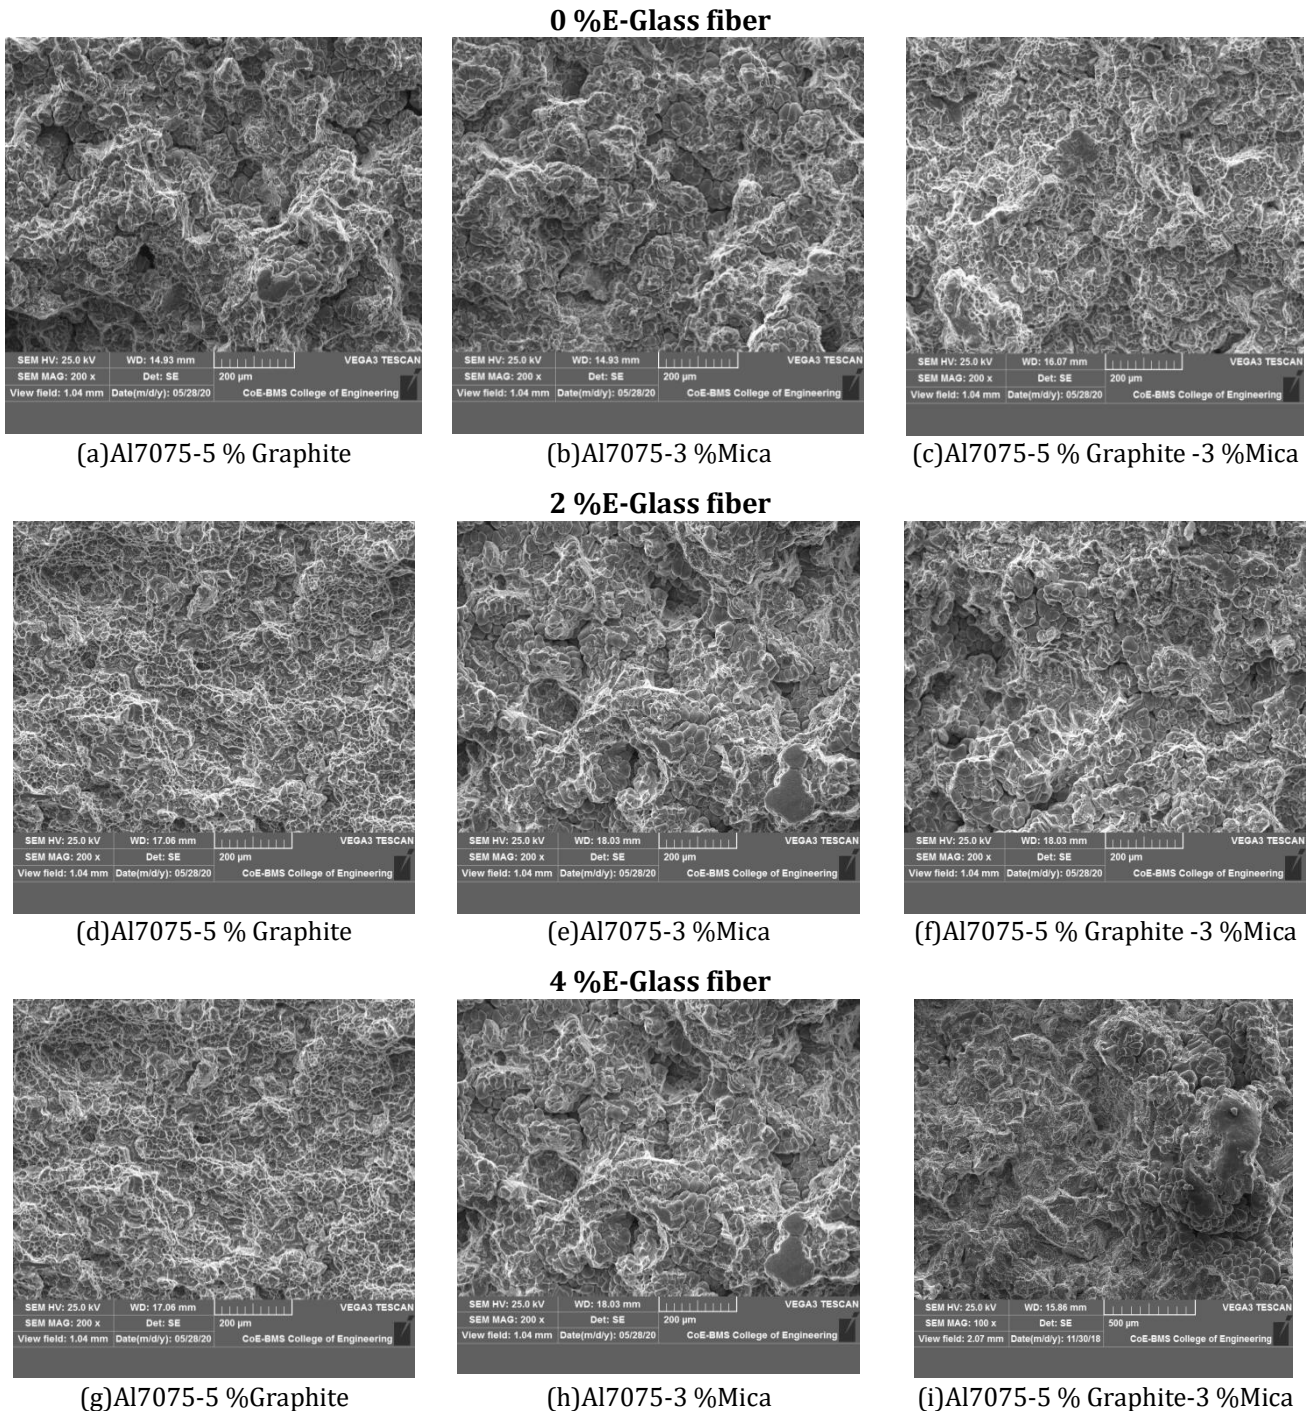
(a-i) Tensile Fracture Surface Analysis (Before heat treatment)
